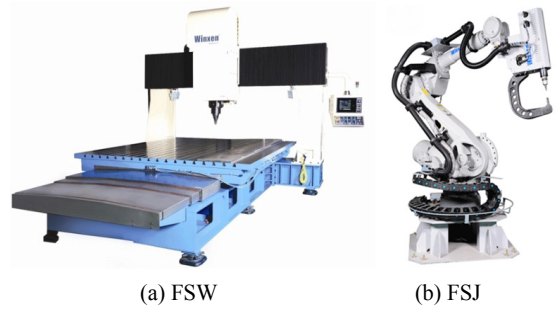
Example of 2-dimensional FSW machine at domestic (WINXEN)
